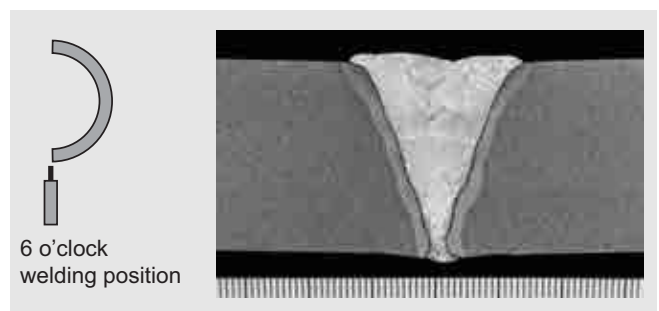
Macrostructure of the weld metal in the 6 o'clock position
